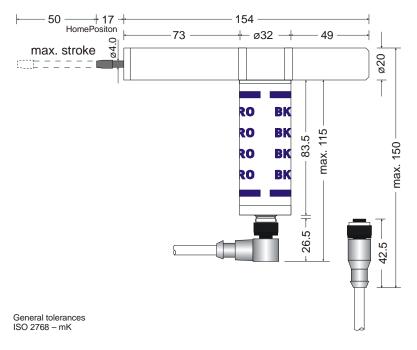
Mechanical Dimensions – Scanner TK9LIN50
